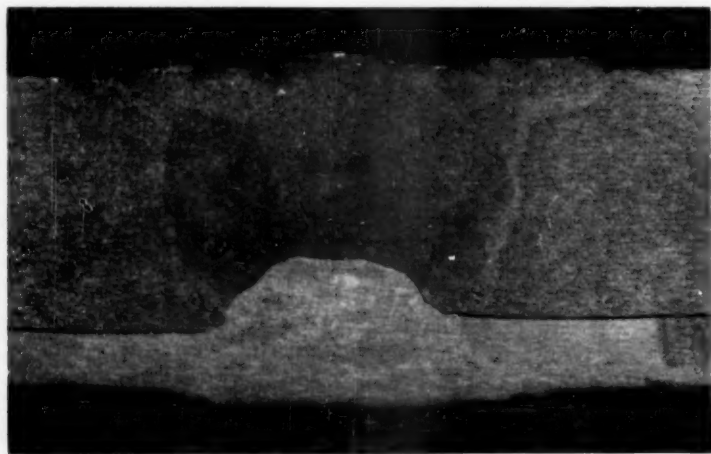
REFINERY A—TYPICAL COMPOSITE BUTT WELD
